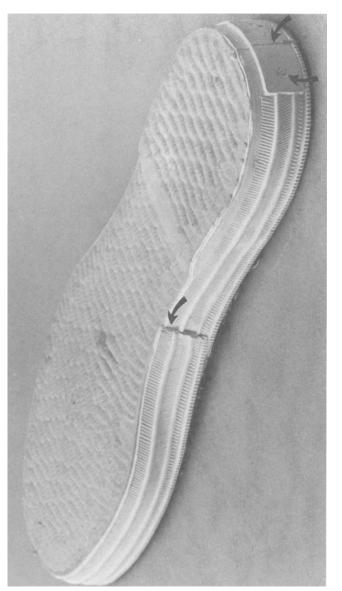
Direct injection molded outsole. Note seam where mold halves joined, injection ports, simulated die cut style outsole, and simulated handwrapped foxing strip.
